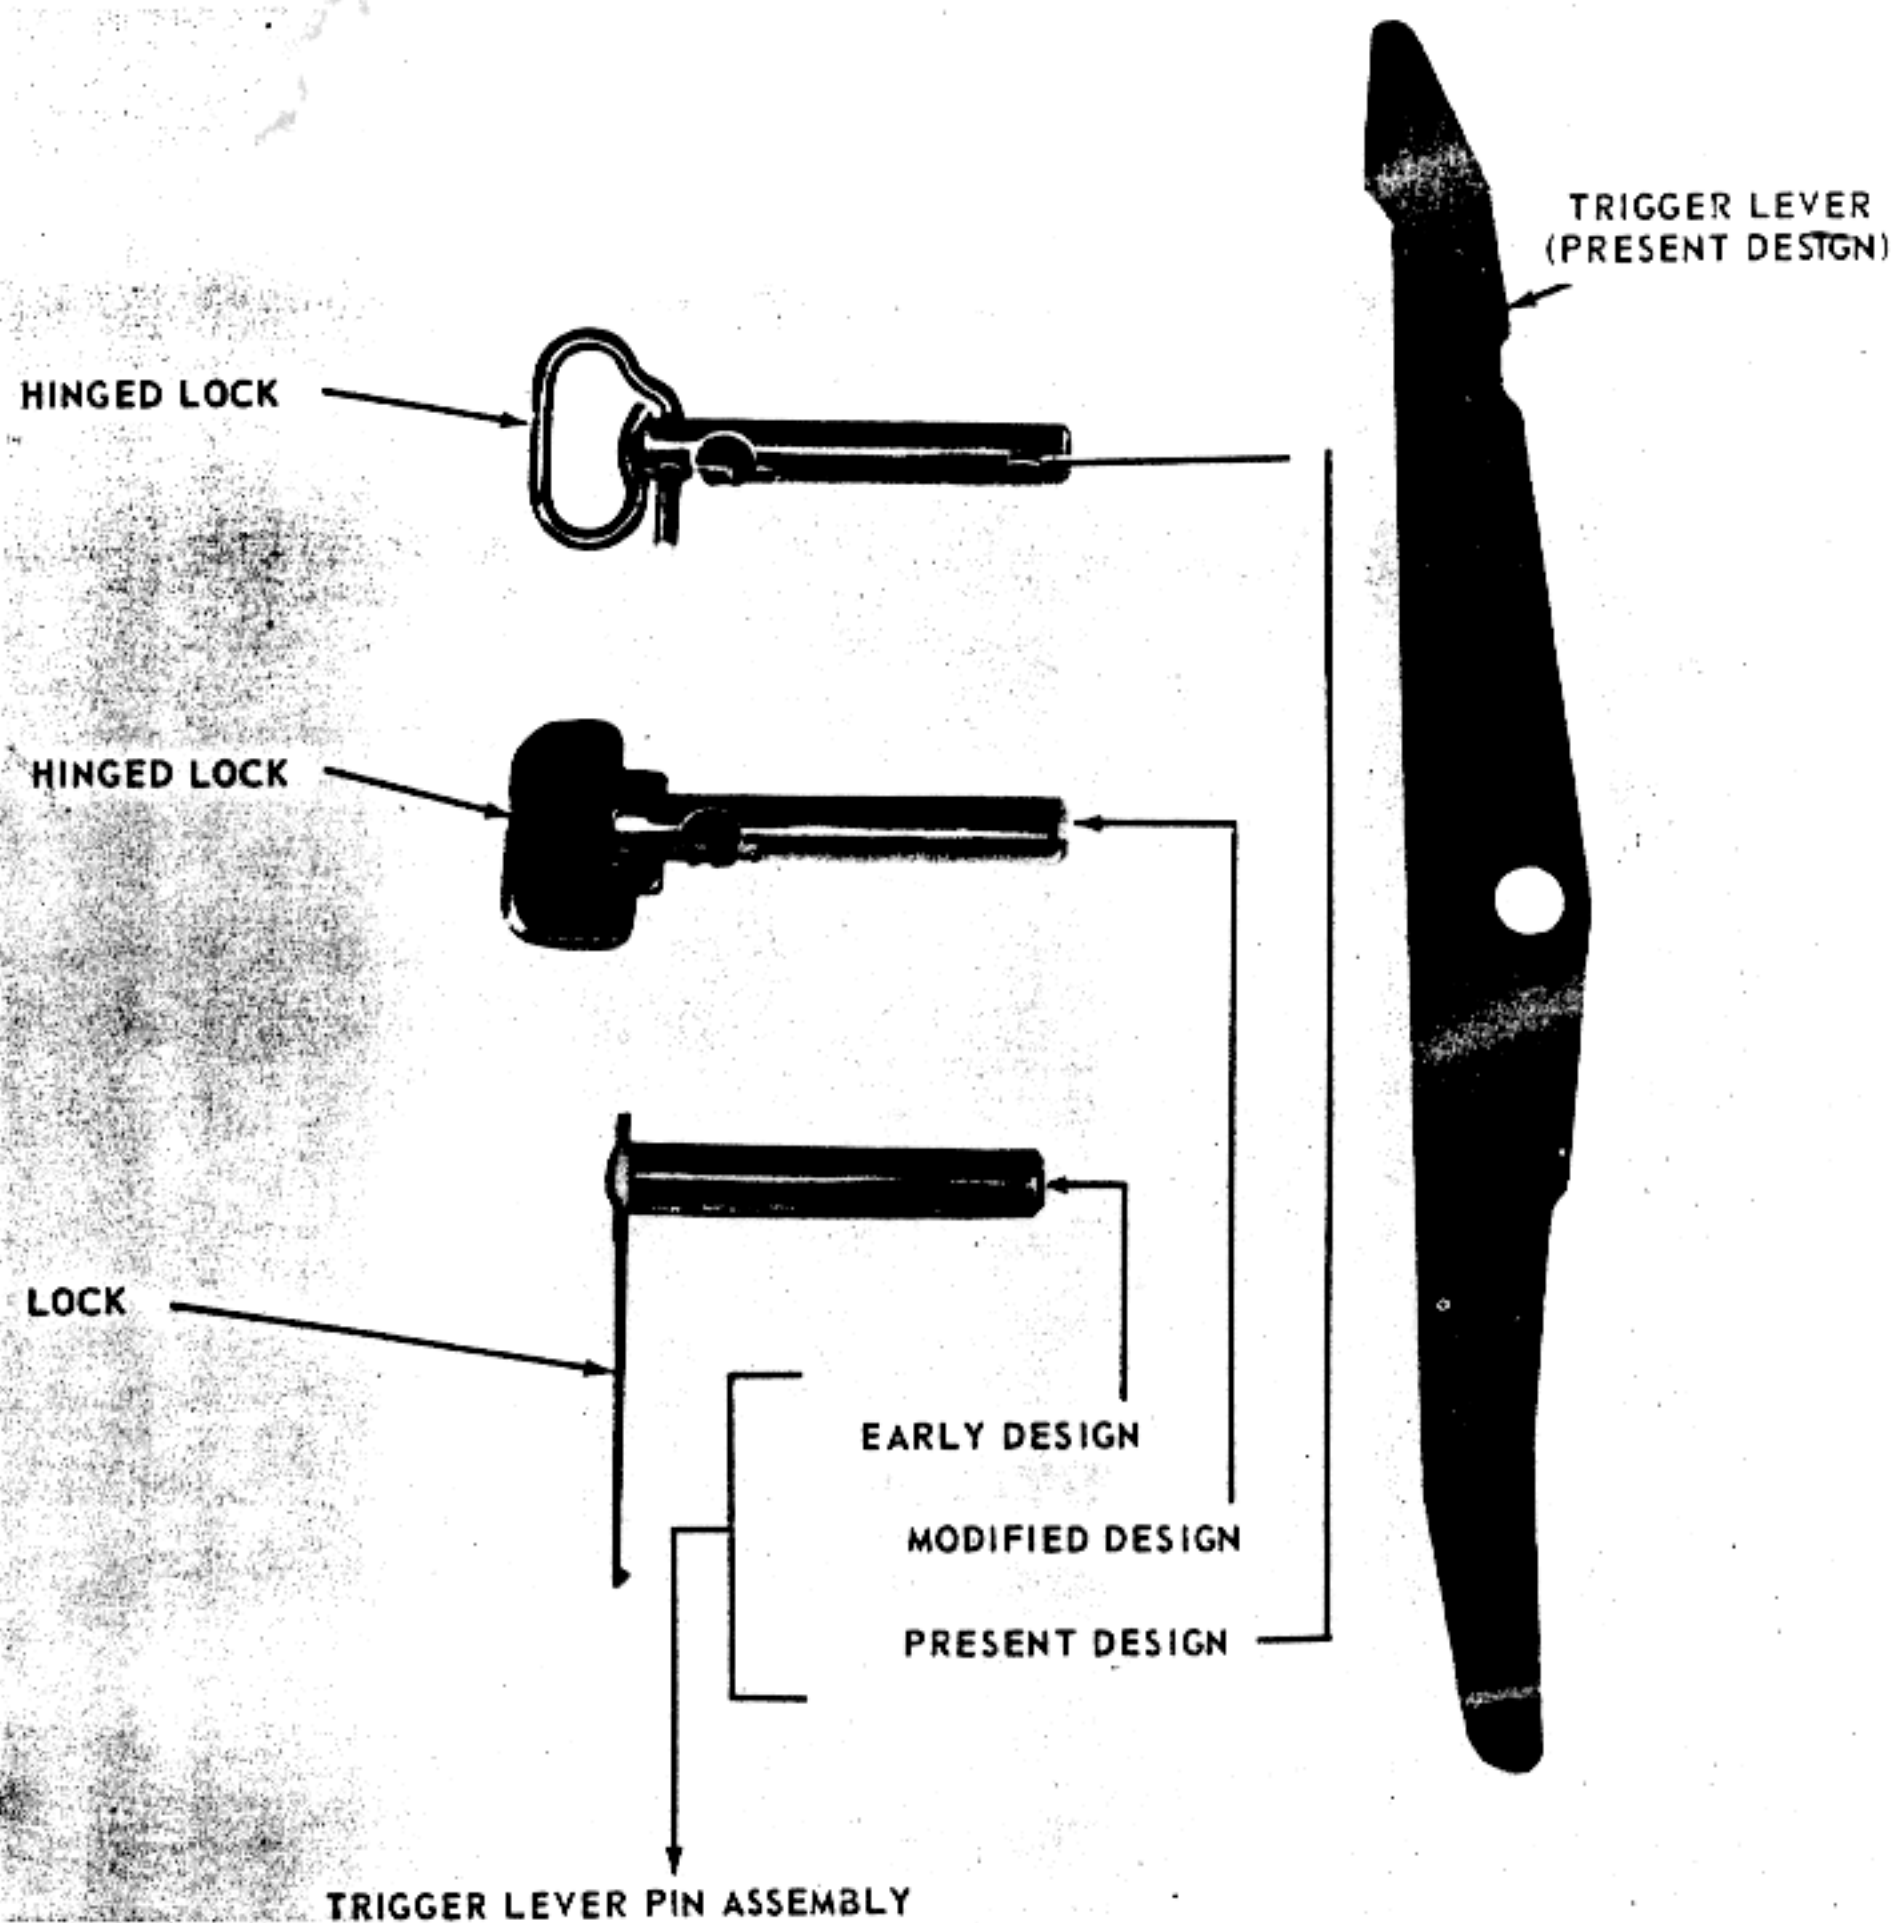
Trigger lever (present design), and trigger lever pin assemblies.
